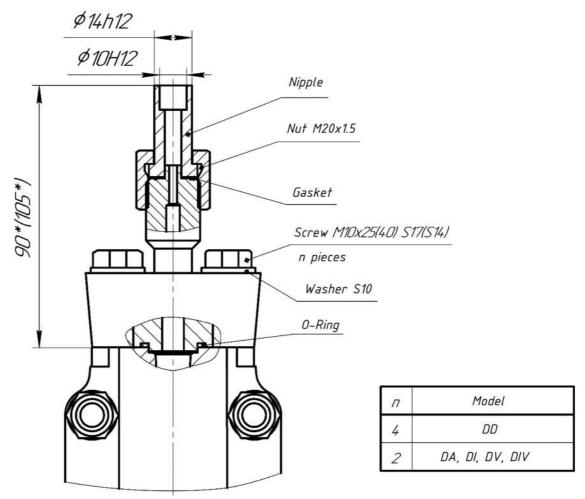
Mounting parts «M20» for modifications of transmitters according to fig. A.1, A.2
